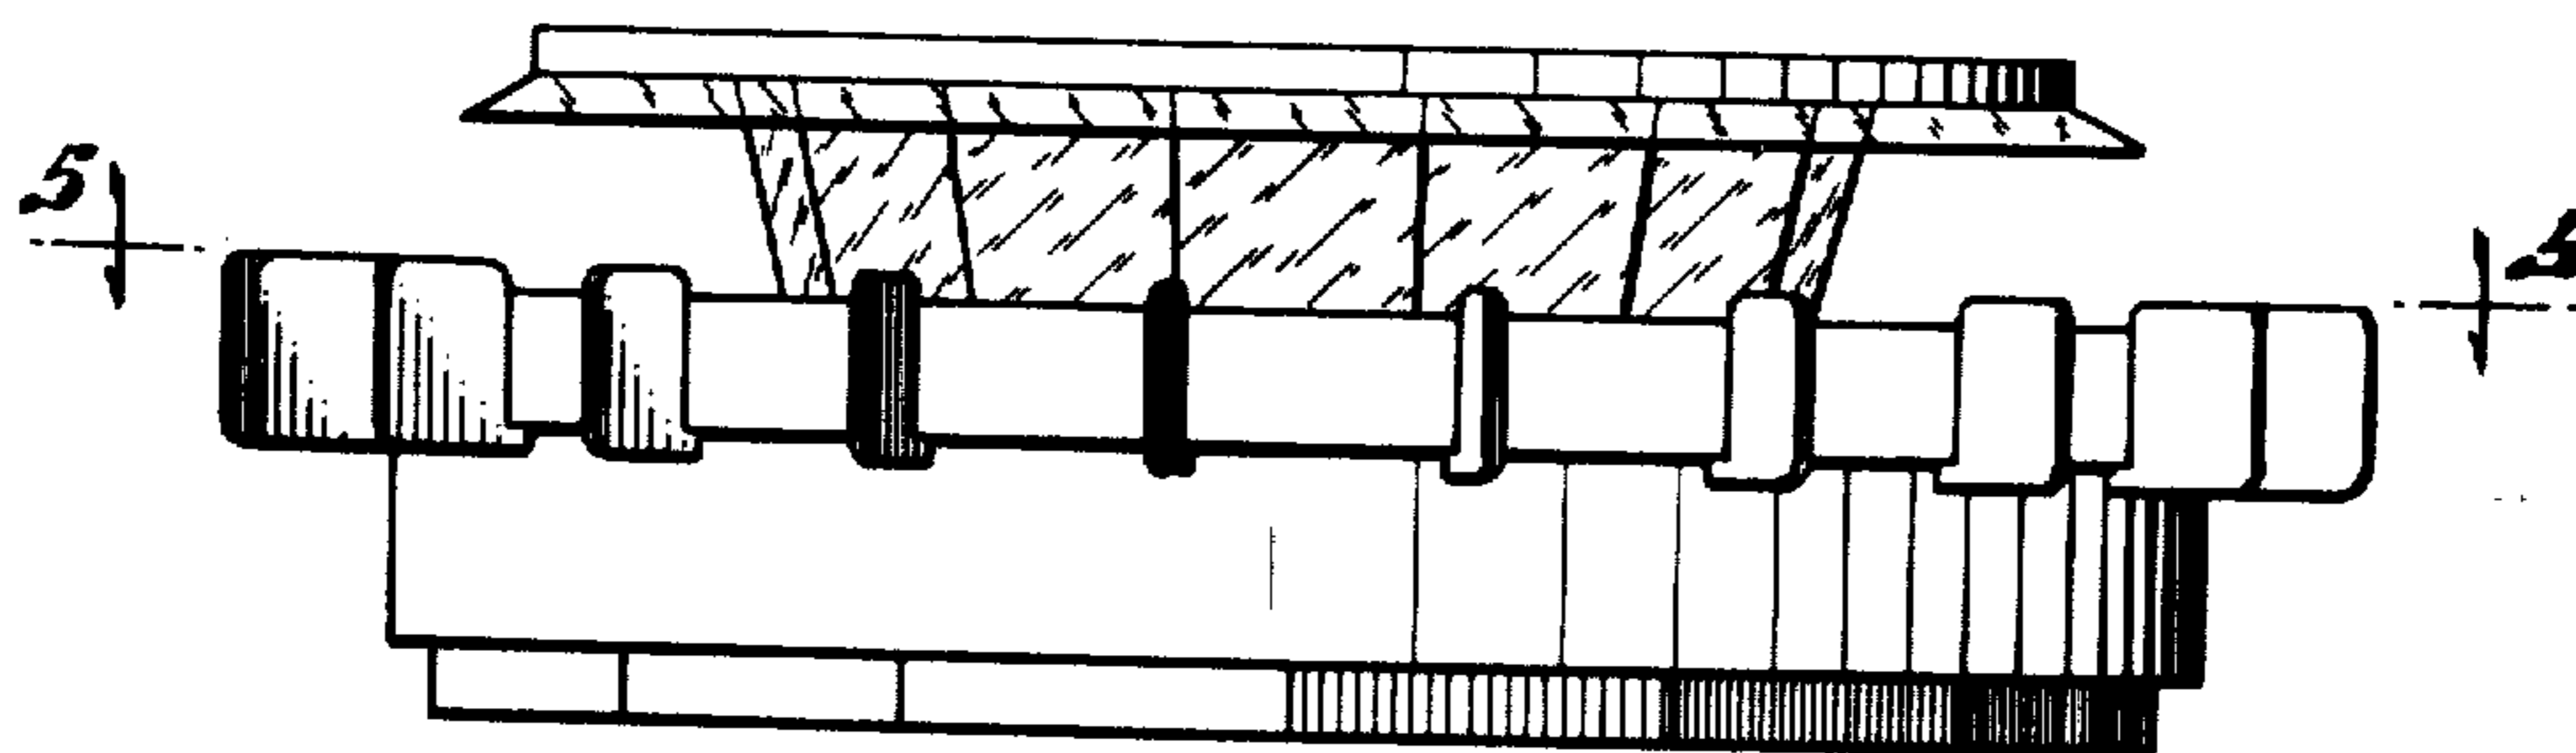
is a top plan view of the embodiment shown in FIG. 1;
